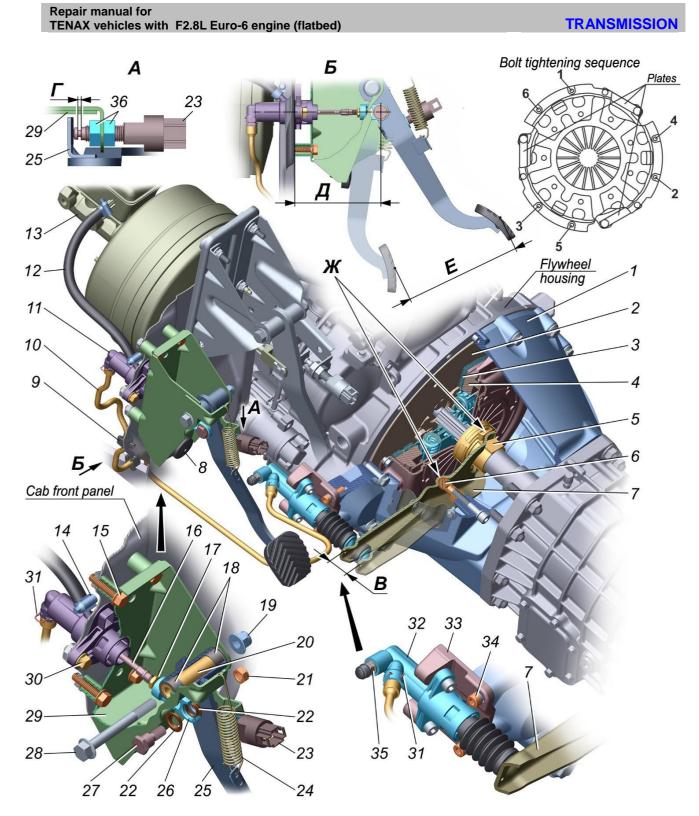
Clutch and clutch release linkage: B – clutch release yoke end stroke; D – clutch pedal position signal switch adjustment dimension; E – push rod eye installation dimension; F – clutch pedal stroke; 1 – clutch housing; 2 – flywheel; 3 – driven plate; 4 – pressure plate; 5 – sleeve with bearing; 6 – clutch release yoke support; 7 – yoke; 8 – clutch pedal buffer; 9, 31 – clips; 10 – pipeline; 11 – clutch main cylinder; 12 – hose; 13 – vacuum booster with brake main cylinder and tank; 14 – clamp; 15, 28, 30 – bolts; 16 – push rod; 17, 19, 21, 36 – nuts; 18 – pedal axis bushings; 20 – spacer bushing; 22 – push rod axis bushings; 23 – clutch pedal position signal switch; 24 – spring; 25 – clutch pedal; 26 – push rod eye; 27 – pedal push rod axis; 29 – clutch pedal bracket; 32 – clutch servo cylinder; 33 – bracket; 34 – screw; 35 – bleeding valve.
